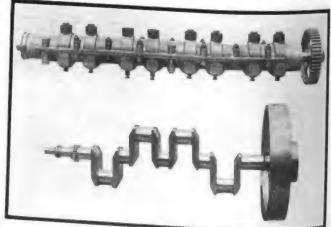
CAMSHAFT. FIG. 2—CRANKSHAFT USED ON PEUGEOT RACES
